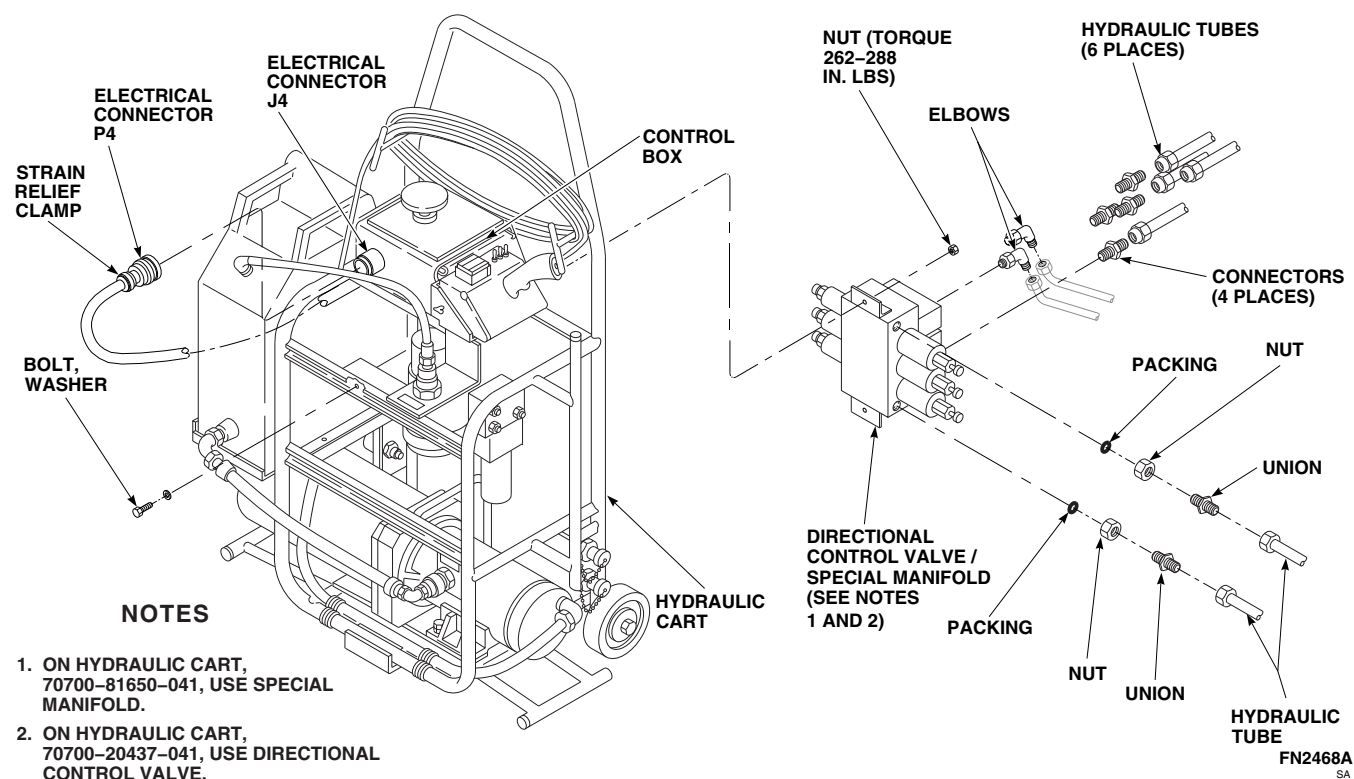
REPLACE AIR TRANSPORT HYDRAULIC CART DIRECTIONAL CONTROL VALVE/SPECIAL MANIFOLD
